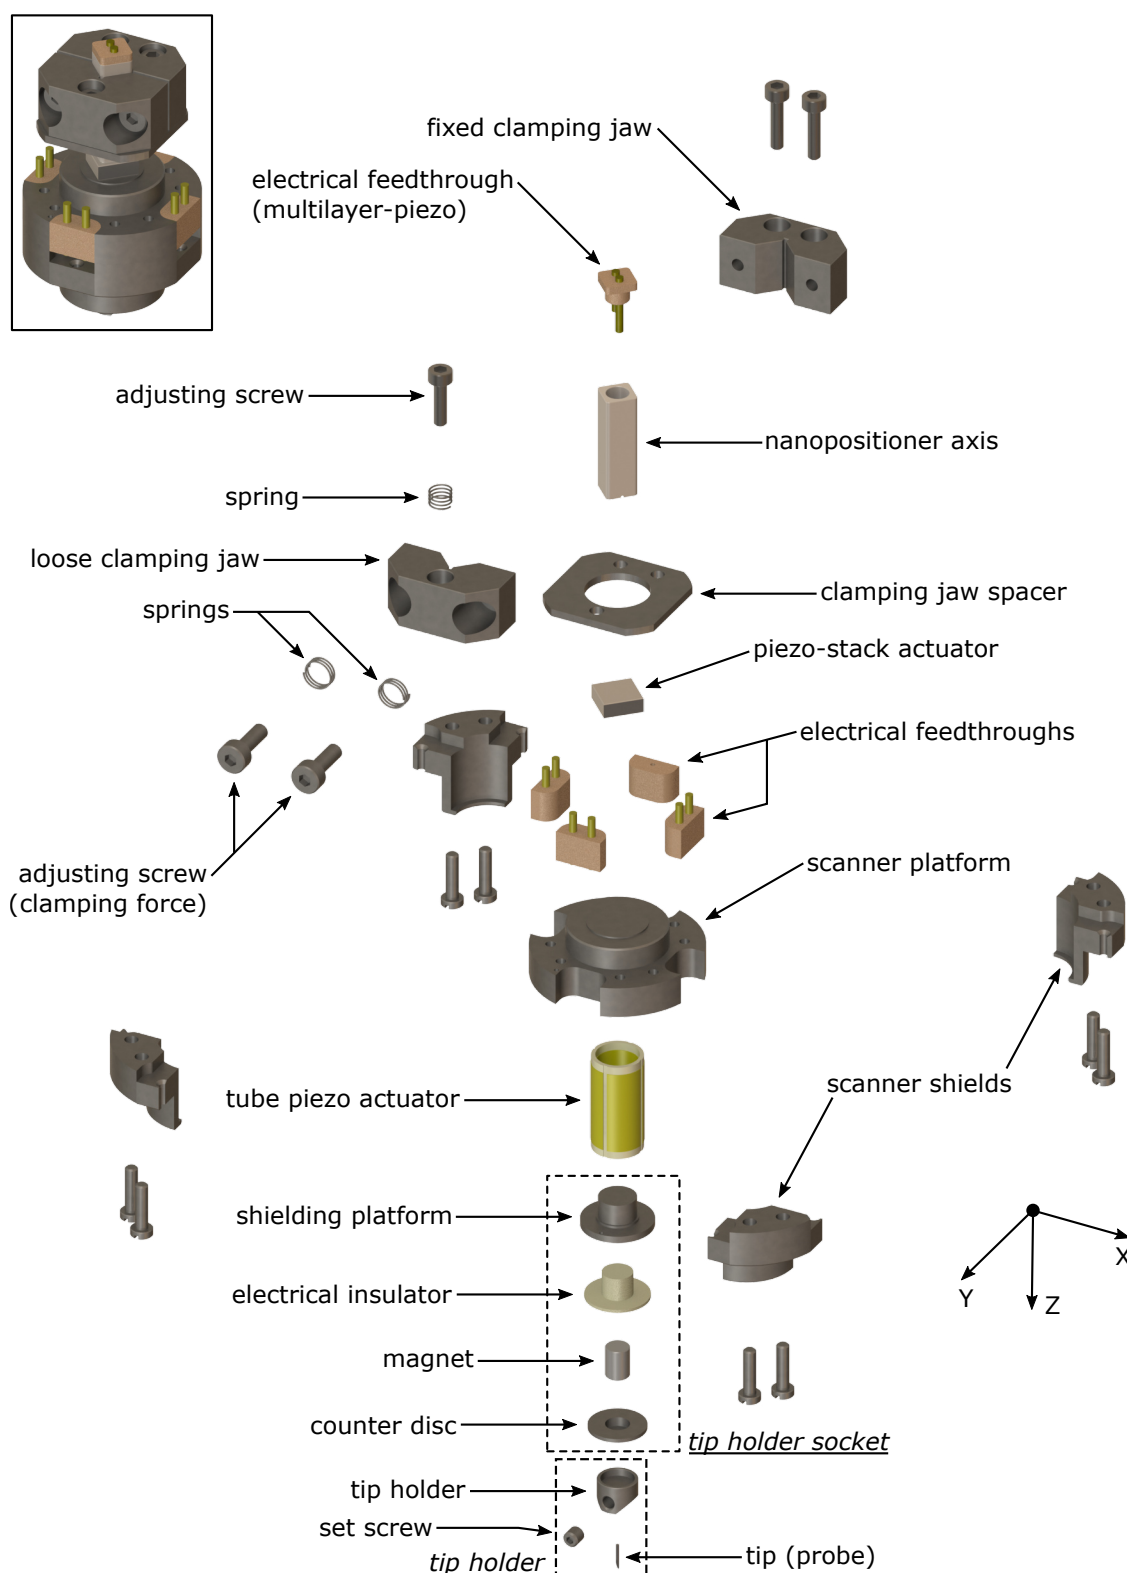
Assembly of the inner STM (version 3) in explosion view.
